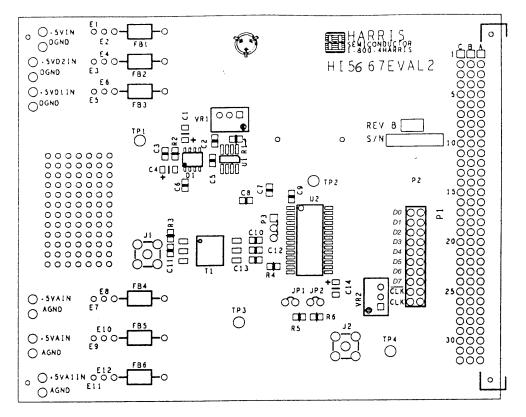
HI5667EVAL2 EVALUATION BOARD PARTS LAYOUT (NEAR SIDE)
